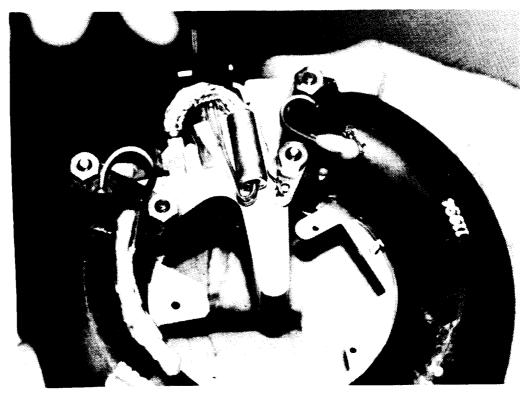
Close-up showing the unique manifold design and mounted gas release system.
